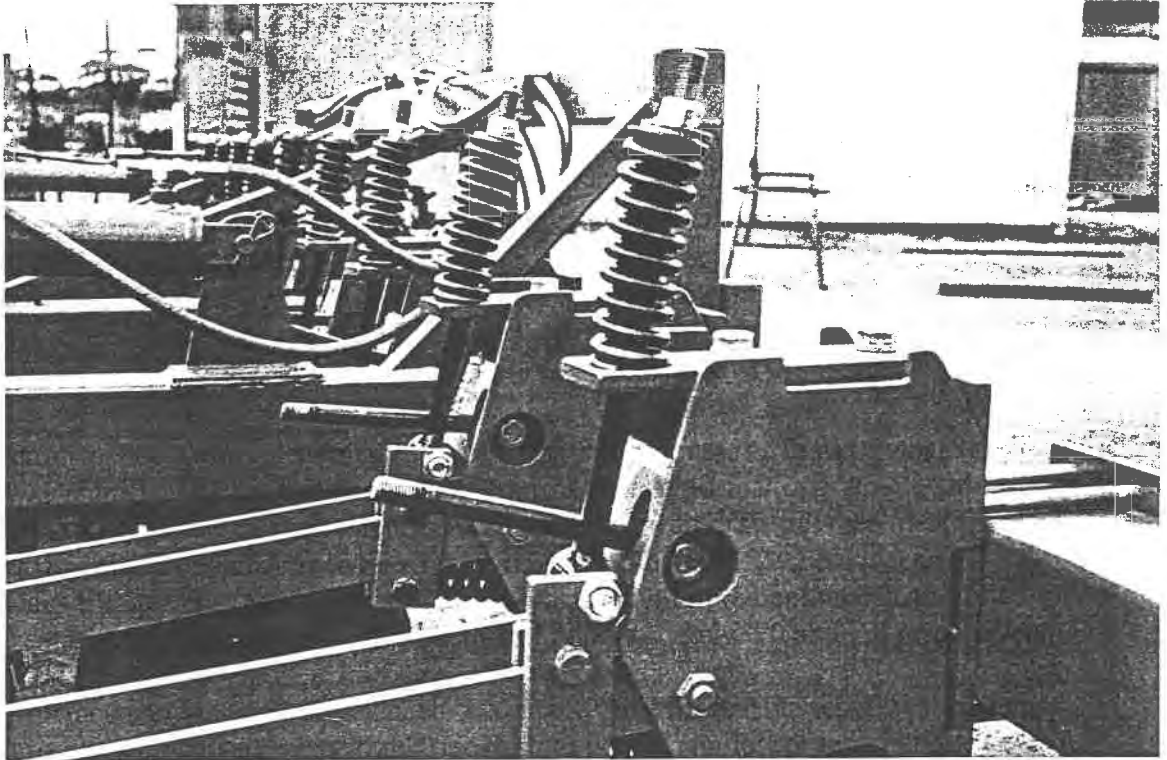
View of the extra bracket and spring added to the opener to adjust the pressure exerted by the press wheel to between 3 kPa and zero kPa. The adjustment is accomplished by tightening the nut above the spring.
